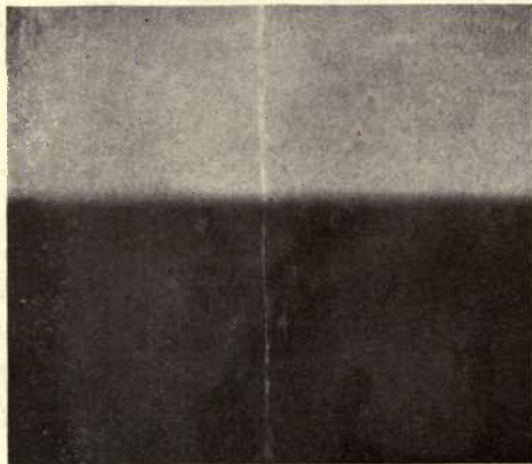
Radiograph of Autogenous Weld in Steel. Sample No. 1. Only the Surfaces Have Been Welded
